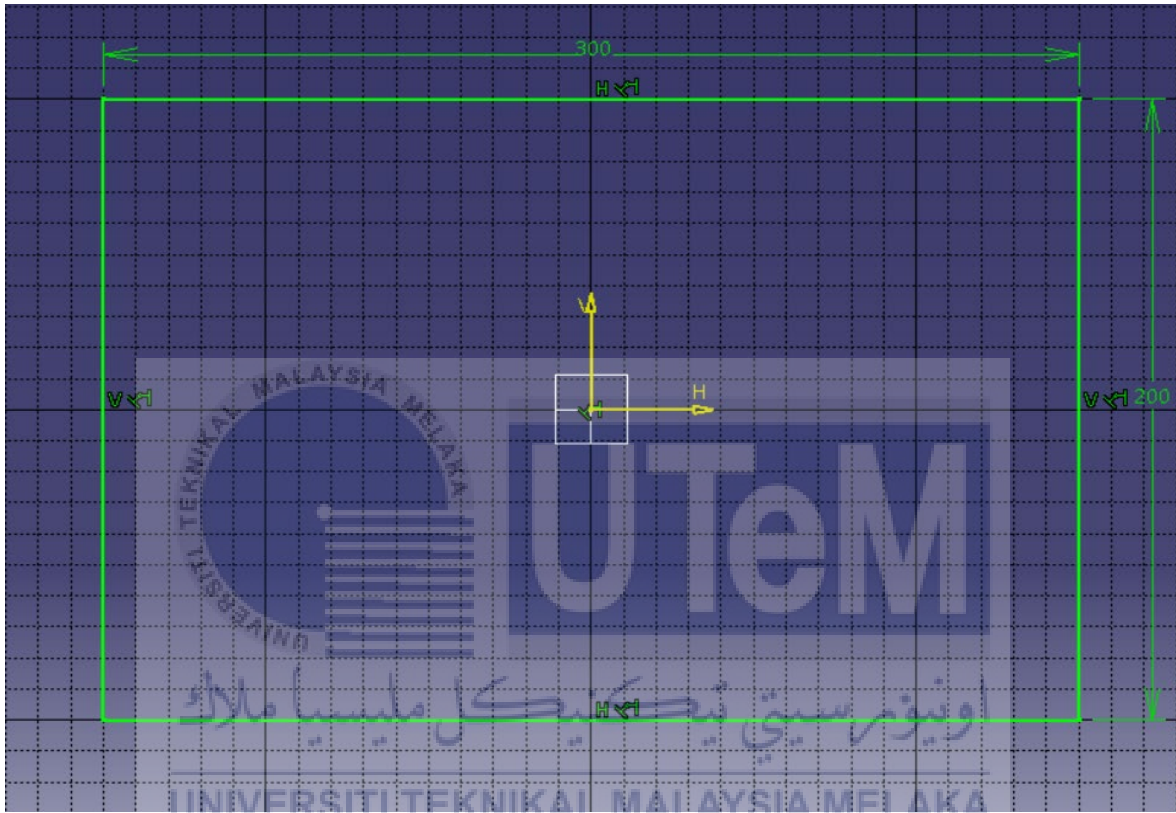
The dimensional design of specimens for tensile and flexural testing
